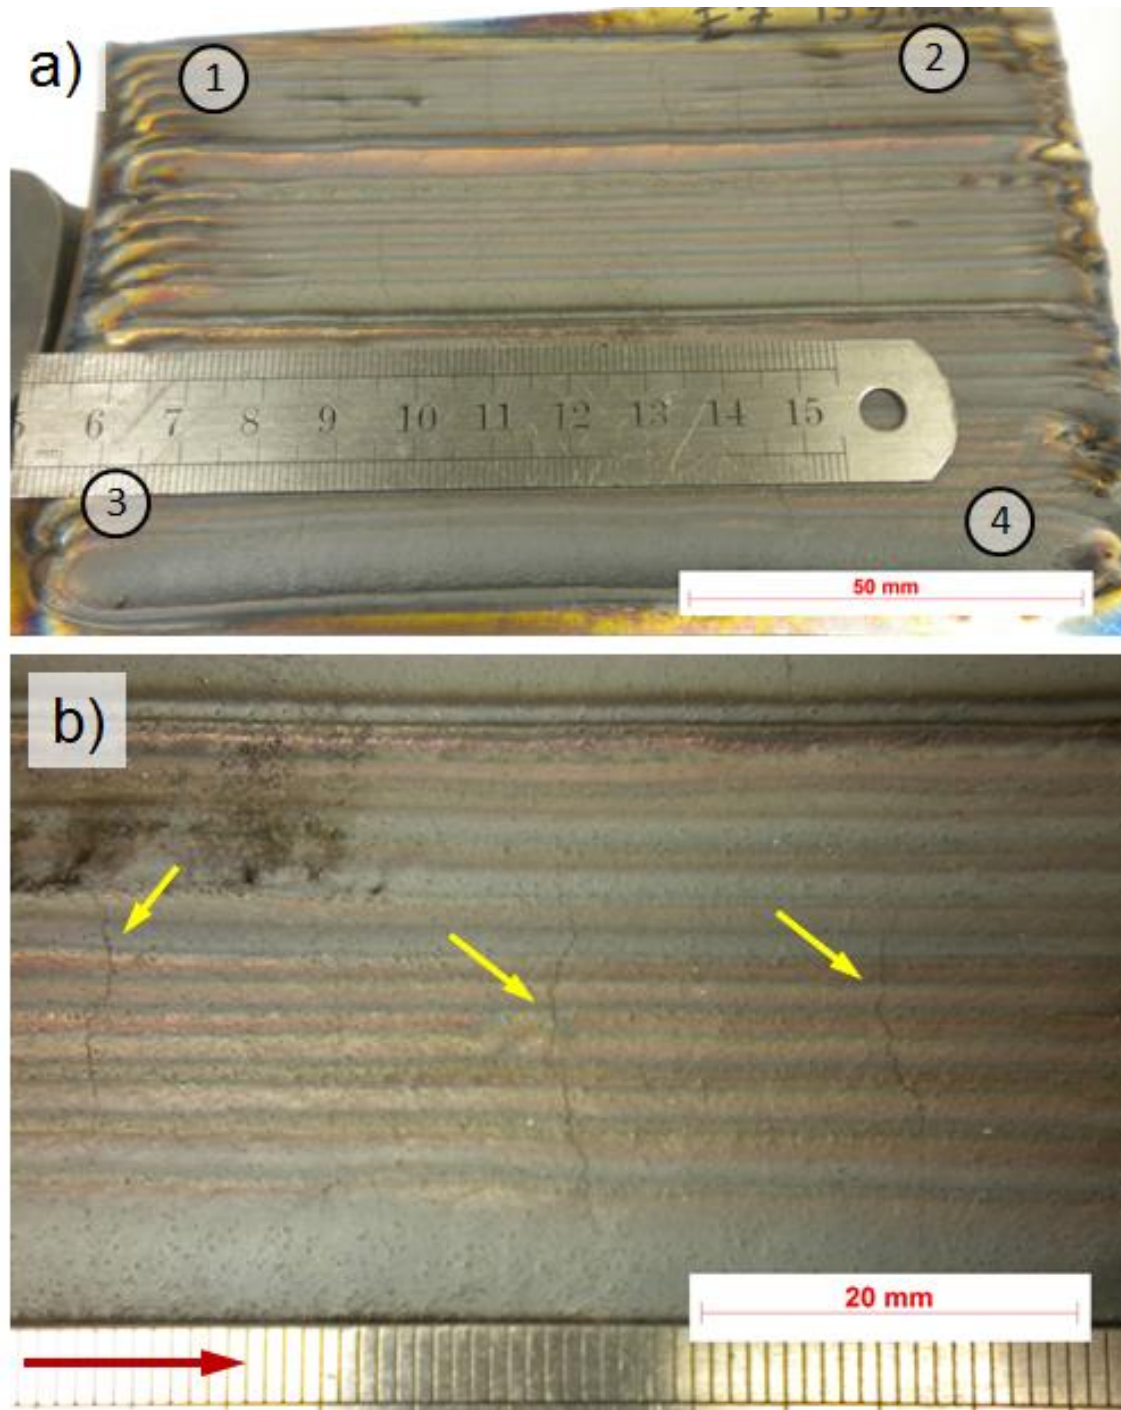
Cladding trial in overlap; a) PFR = 0 g/min; b) magnified image of a); 1: Beginning of first weld; 2: finish of first weld; 3: beginning of last weld; 4: finish of last weld; red arrow: welding direction
